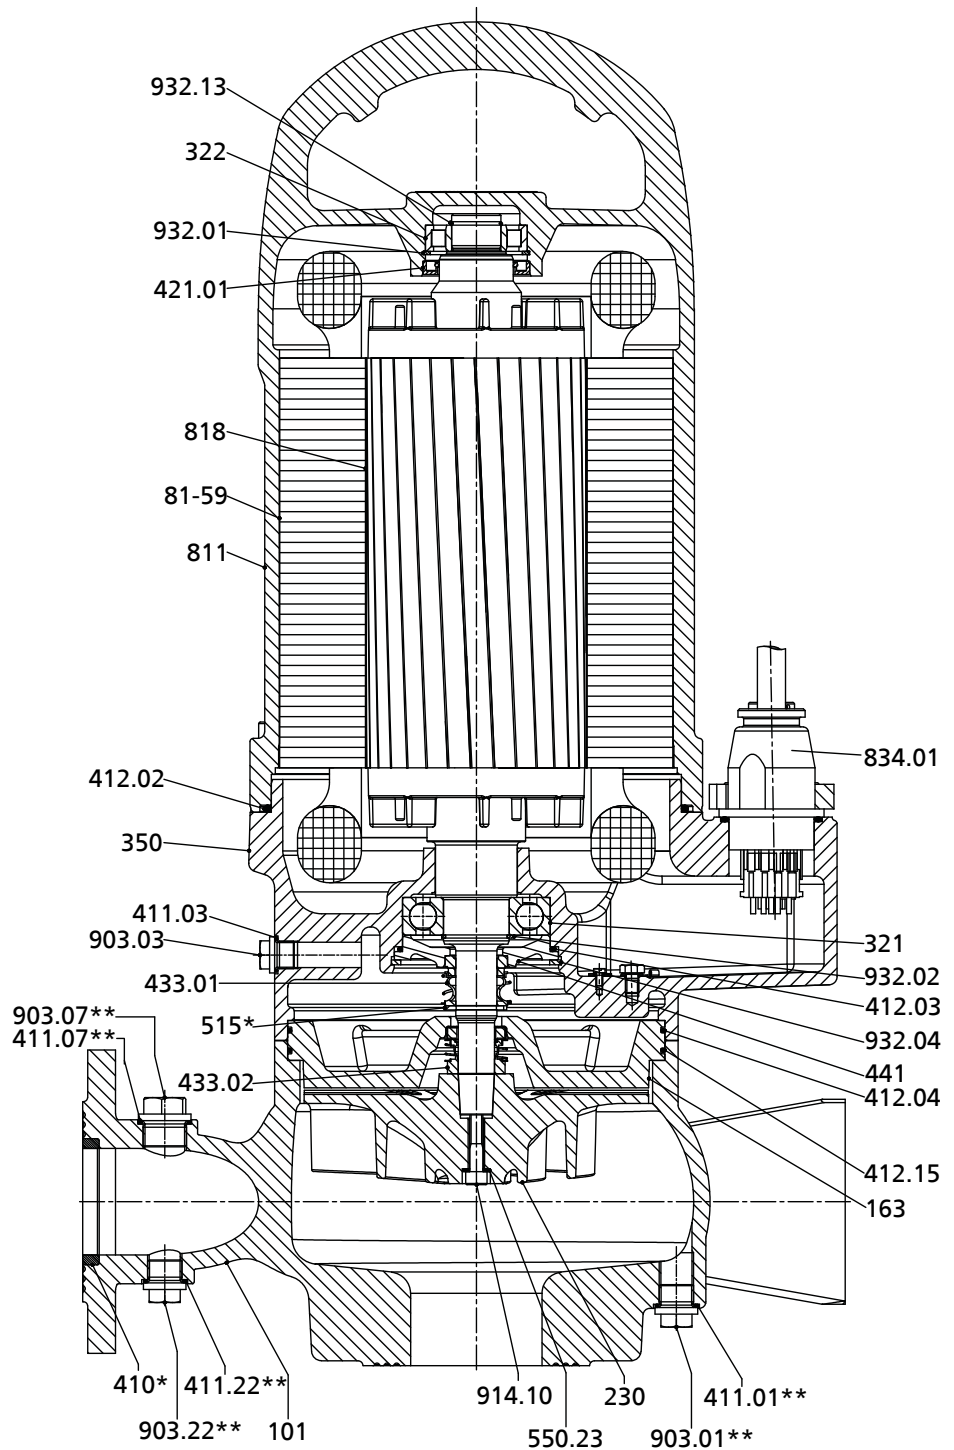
General assembly drawing Amarex KRT, motor type 2
